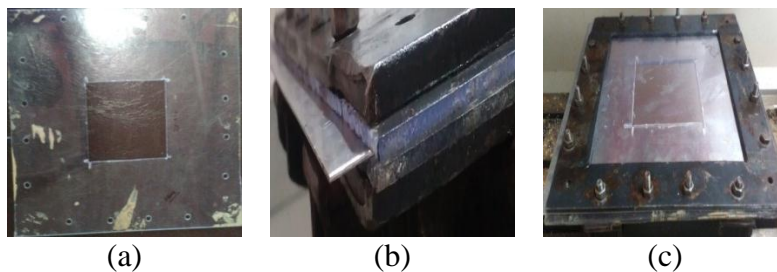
(a) Acrylic sheet used for reduction of area, (b) aluminum sheet between two acrylic sheets and (c) setup after fixing acrylic sheet on CNC Table
